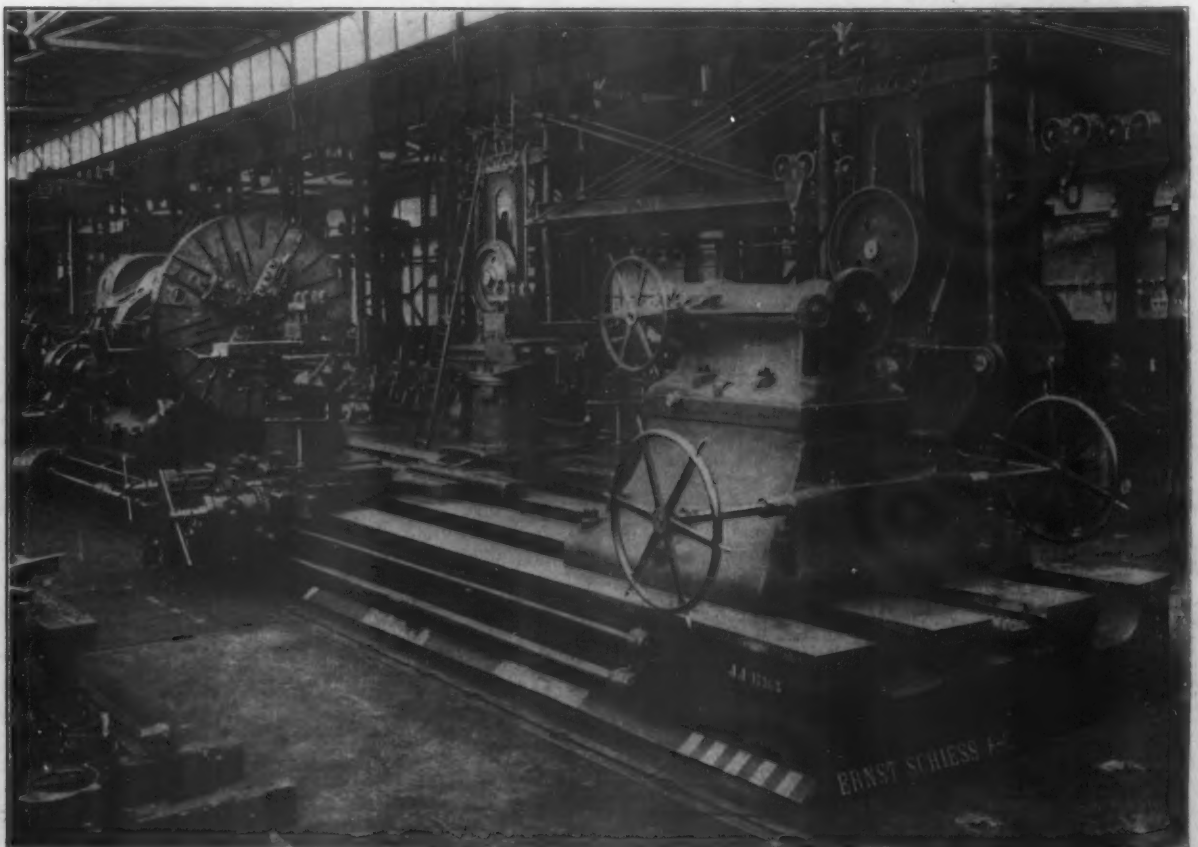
Lathe with 132-in. Swing and Weighing 209,437 lb., Built by the Ernst Schiess Werkzeugmaschinenfabrik.
